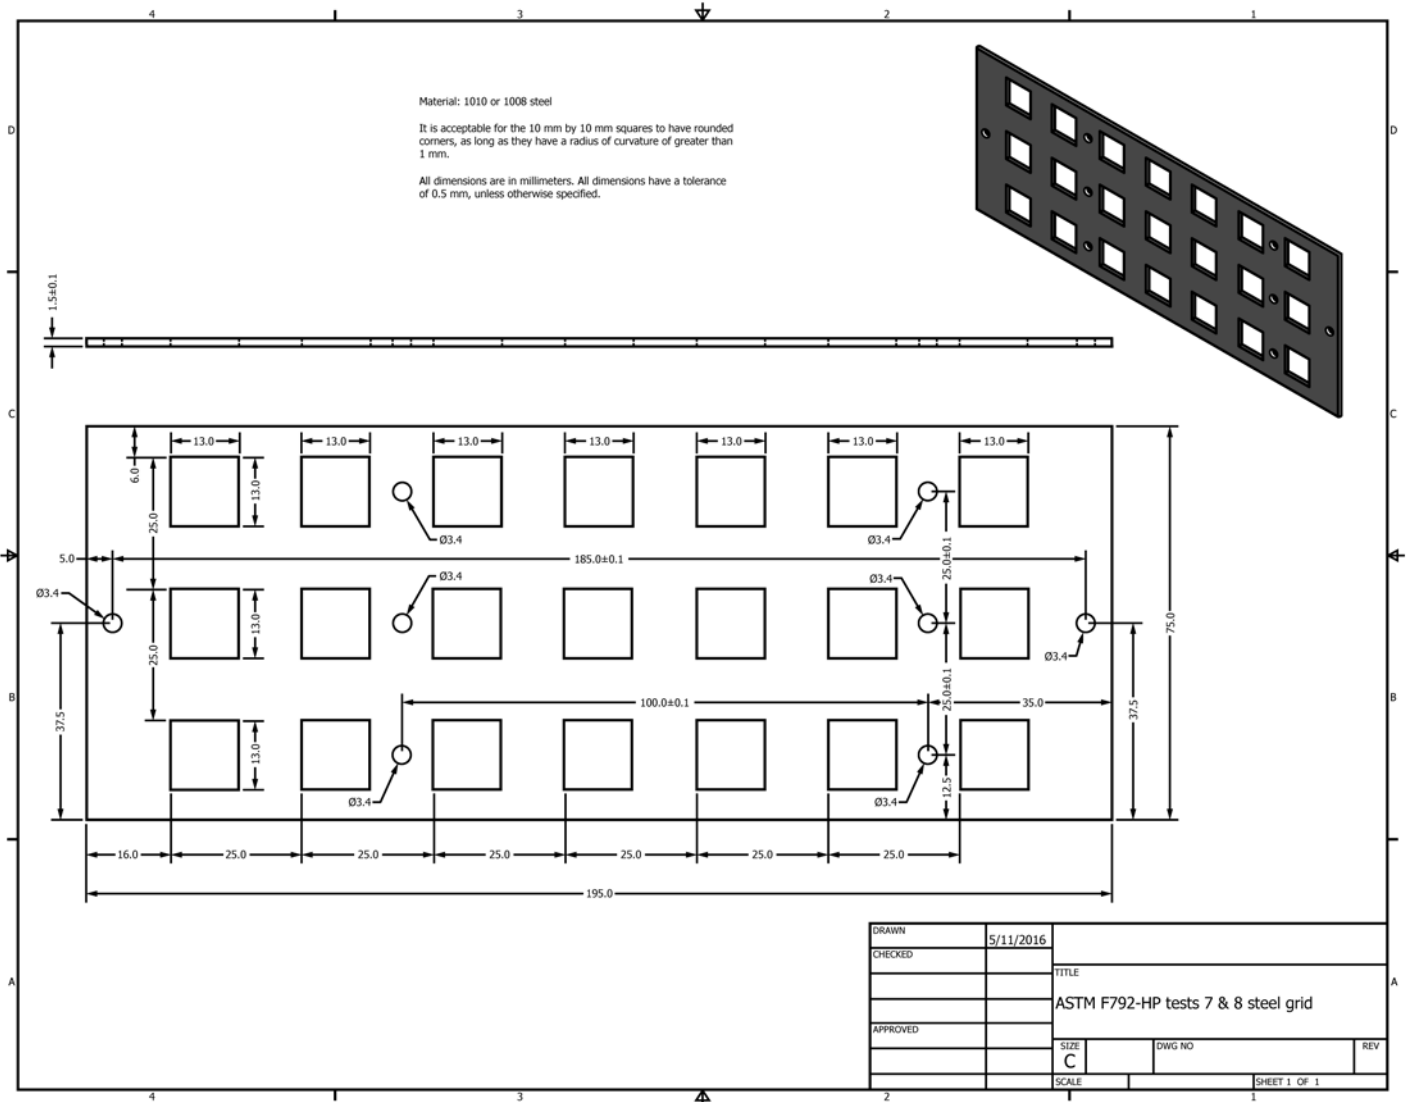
Practice F792 – HP Mechanical Drawing
